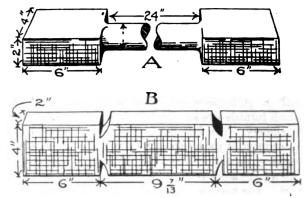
CALCULATING THE SEPARATE PARTS IN IRREGULAR SHAPED FORGINGS.
